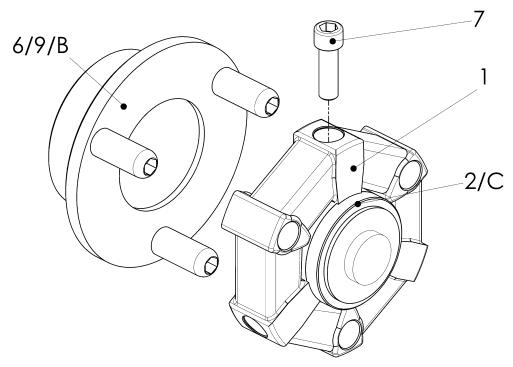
Mounting the rubber element (Type 008A-00001...00200-.S..)
